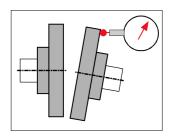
Checking the shaft alignment using a hairline gauge Fig. 7.3.2 Checking the angular offset using a dial gauge
